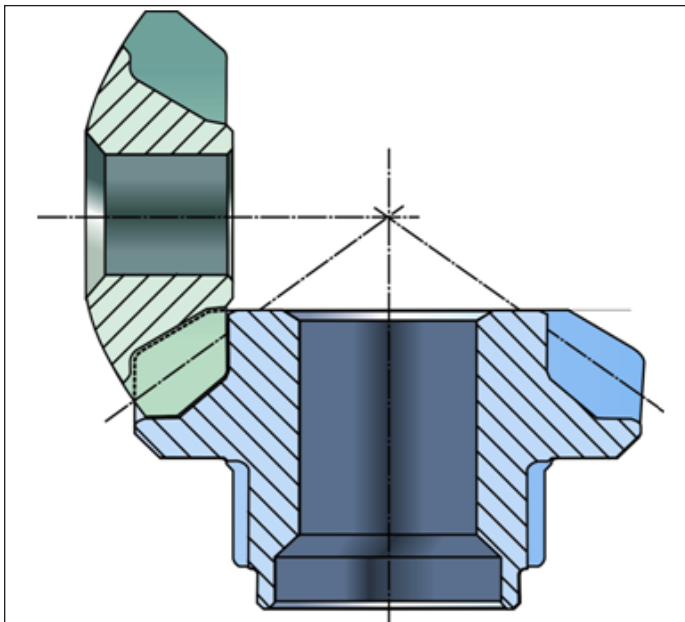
Cross-sectional drawing of forged differential gear pair with web-closed heel.
